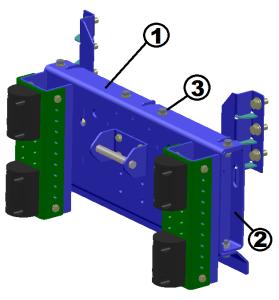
Bumper Installation Key 1 – Bumper Assembly Key 2 – Base Plate Key 3 – Bolt Location
